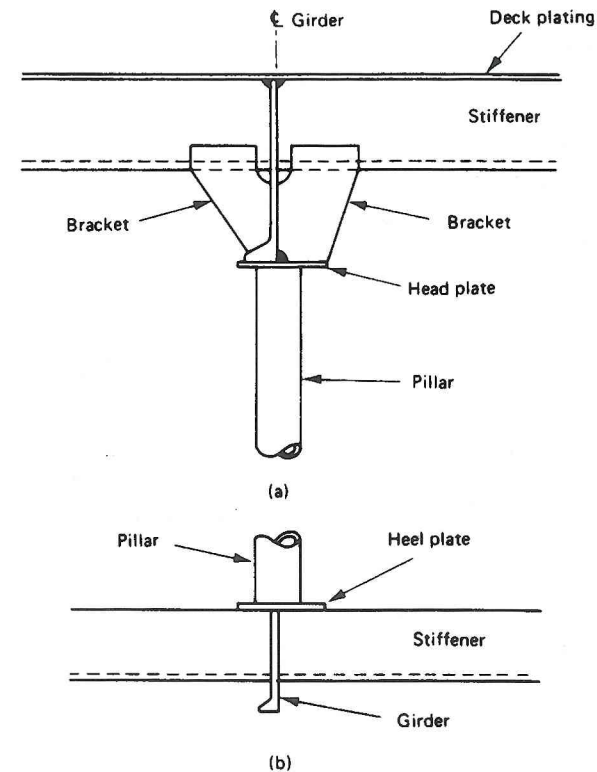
Tubular pillar arrangements: (a) pillar head connection; (b) pillar heel connection
